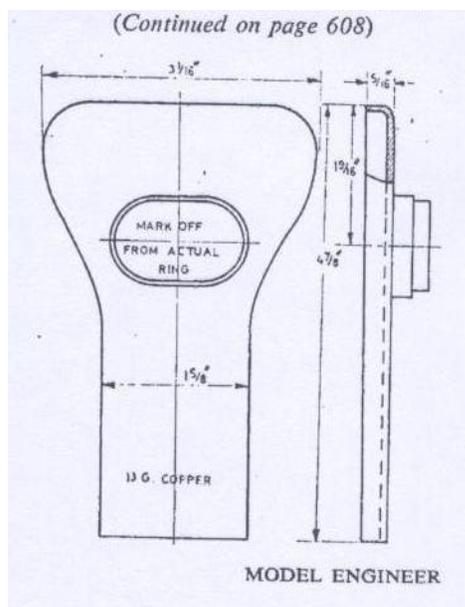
; Flat Pattern & Final Dimensions drawing for Throat Plate
